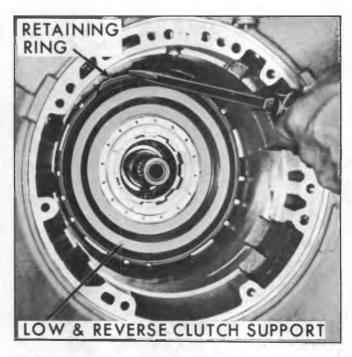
M--Removing Low and Reverse Clutch Support Retaining Ring
